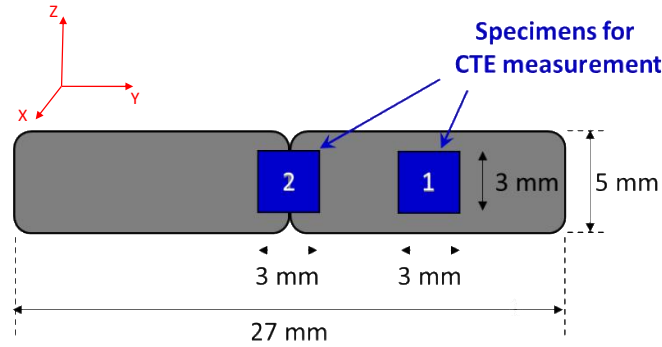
Schematic showing TMA samples size and location in deposited AM bead
